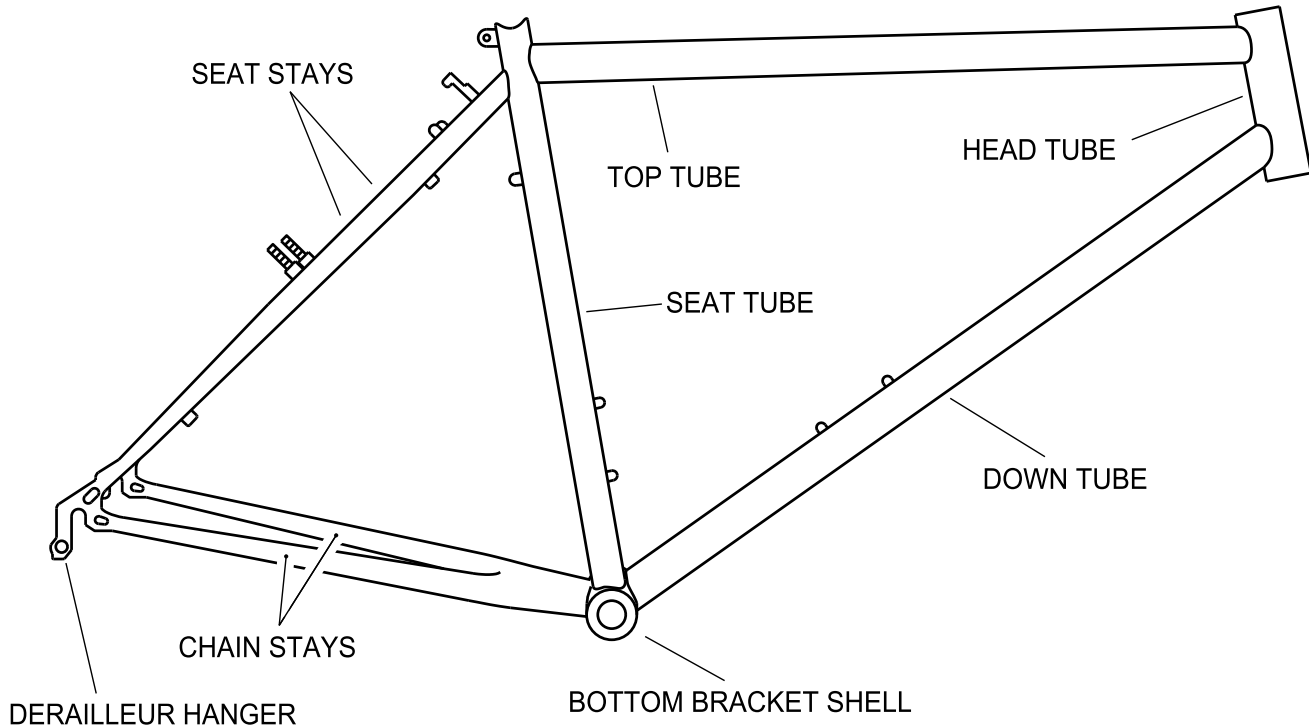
(Sheet 1 of 1) Welded frame joints
